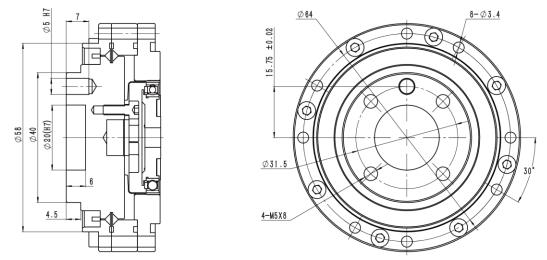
Diagram of wrist flange dimensions of AIR3-560-XP spraying robot
